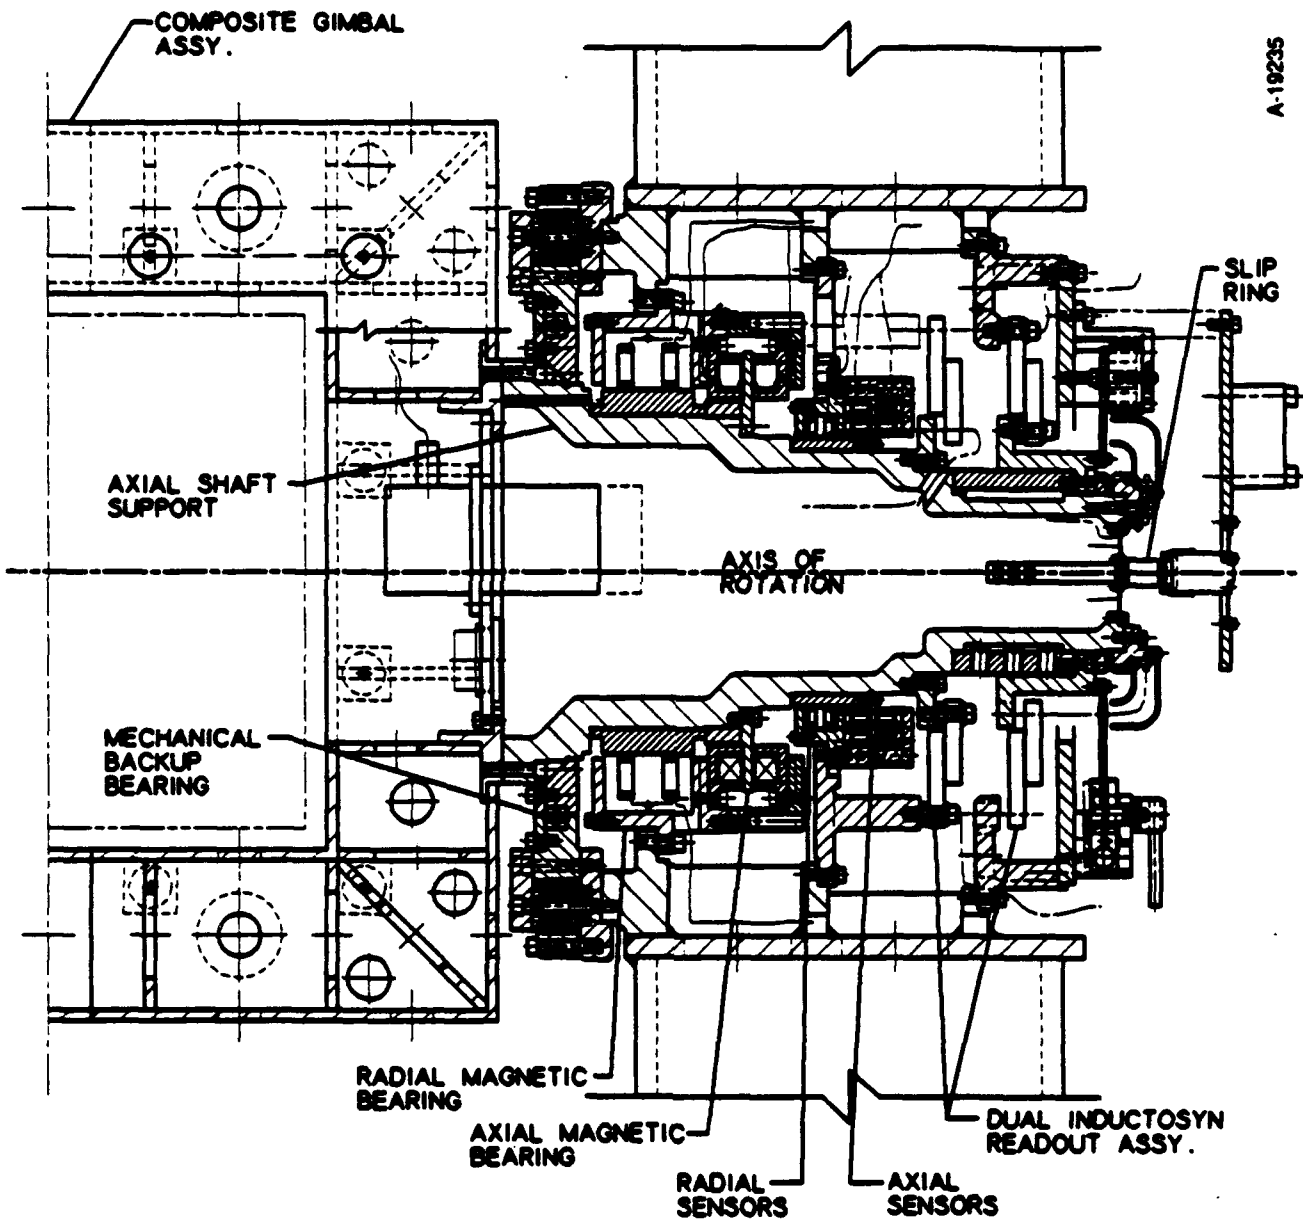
Single Axis Test Table Readout Side Assembly Drawing
